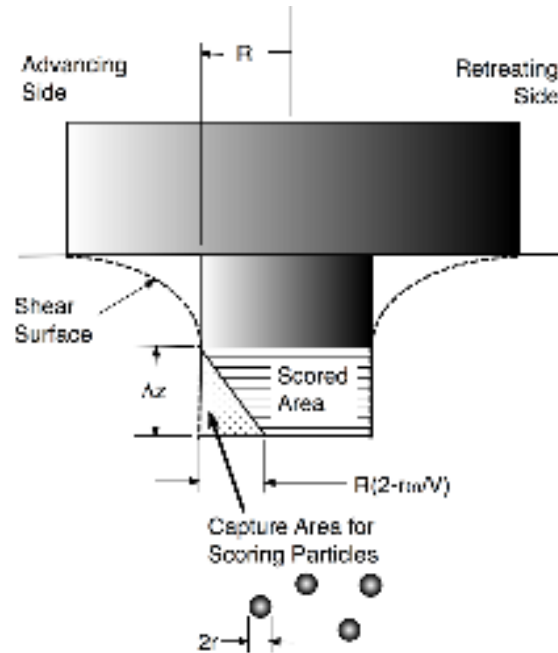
Illustration of shear region and scored area for friction stir welding tool probe [111].
